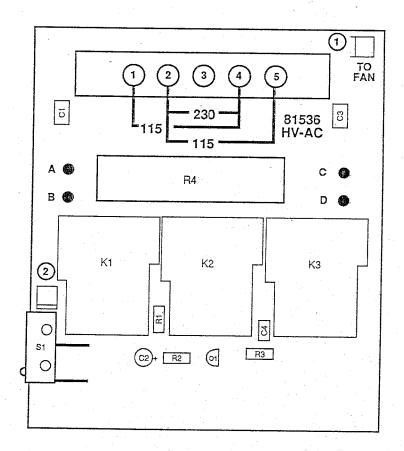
81536 HV-AC BOARD COMPONENT LAYOUT
